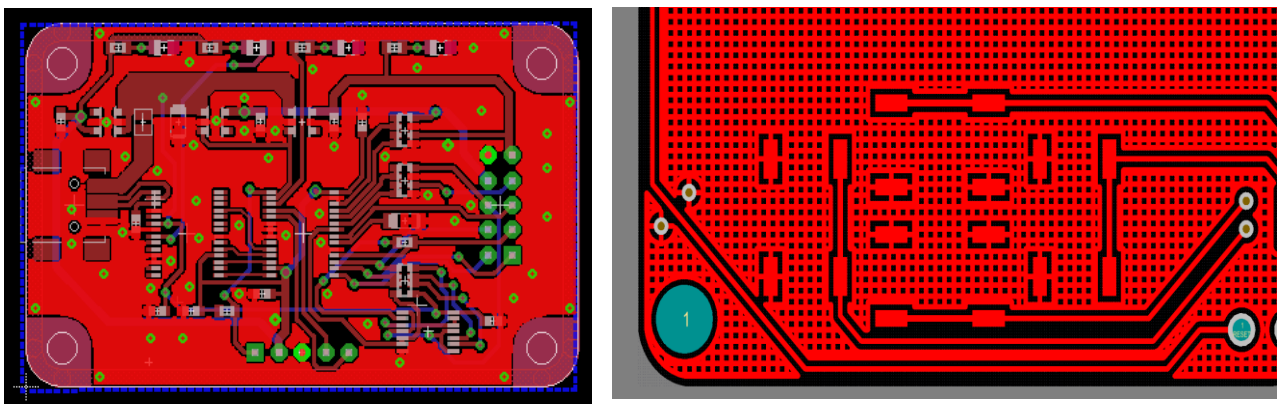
VIA IN MULTILAYER PRINTED MATTER.
